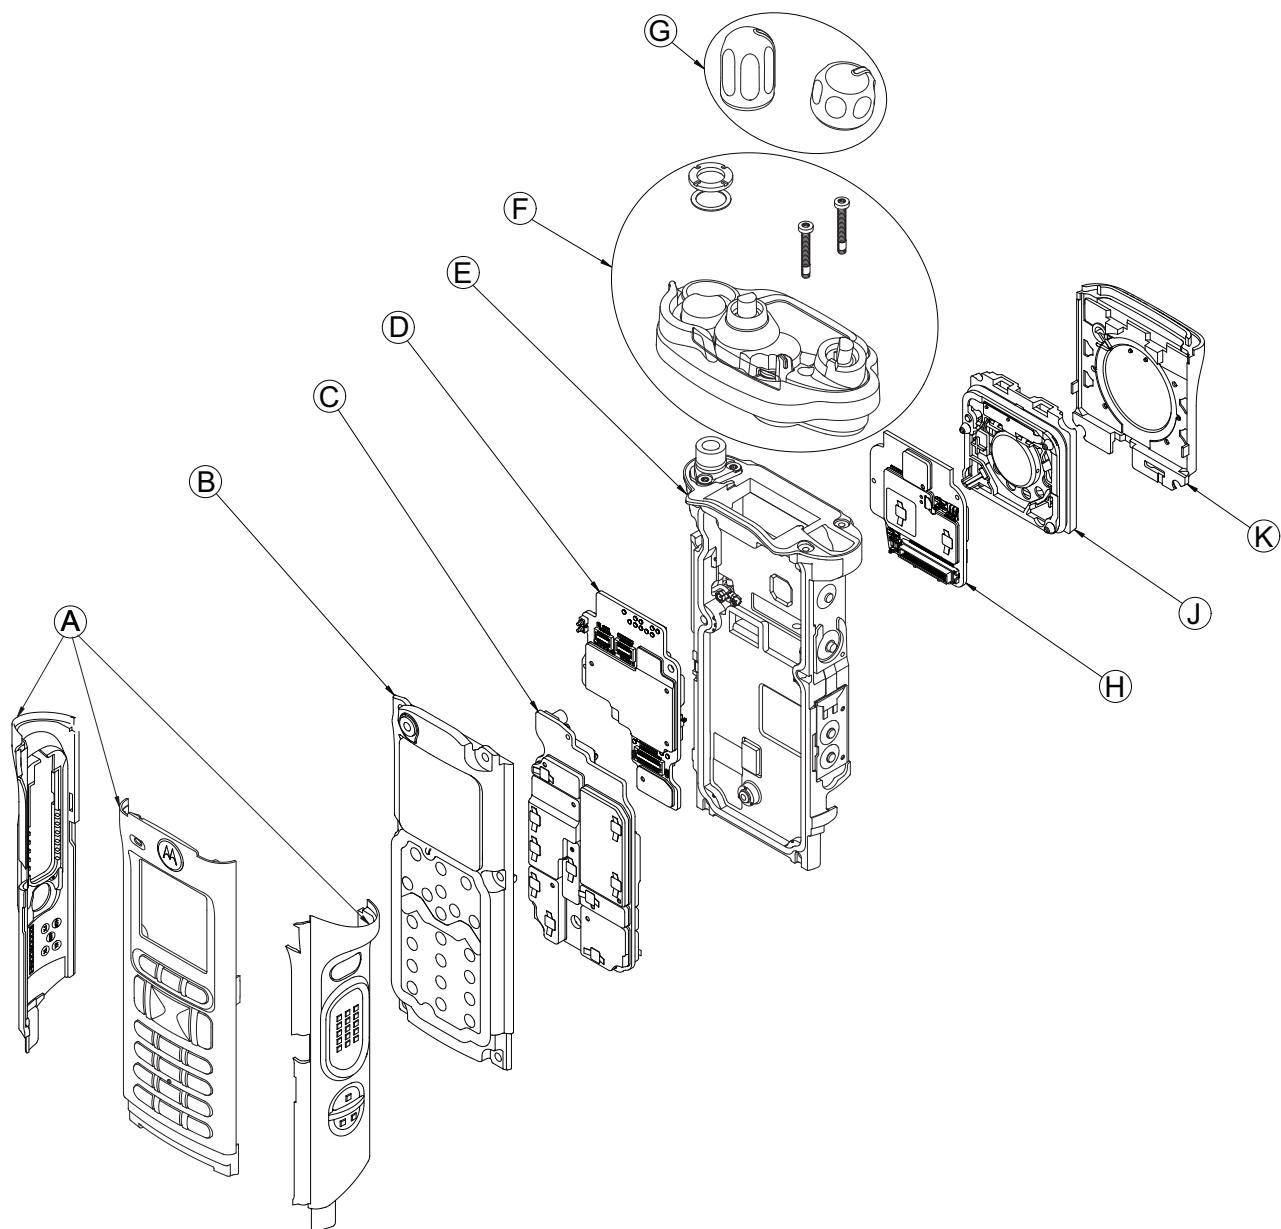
APX 6000XE Dual Display Partial Exploded View
